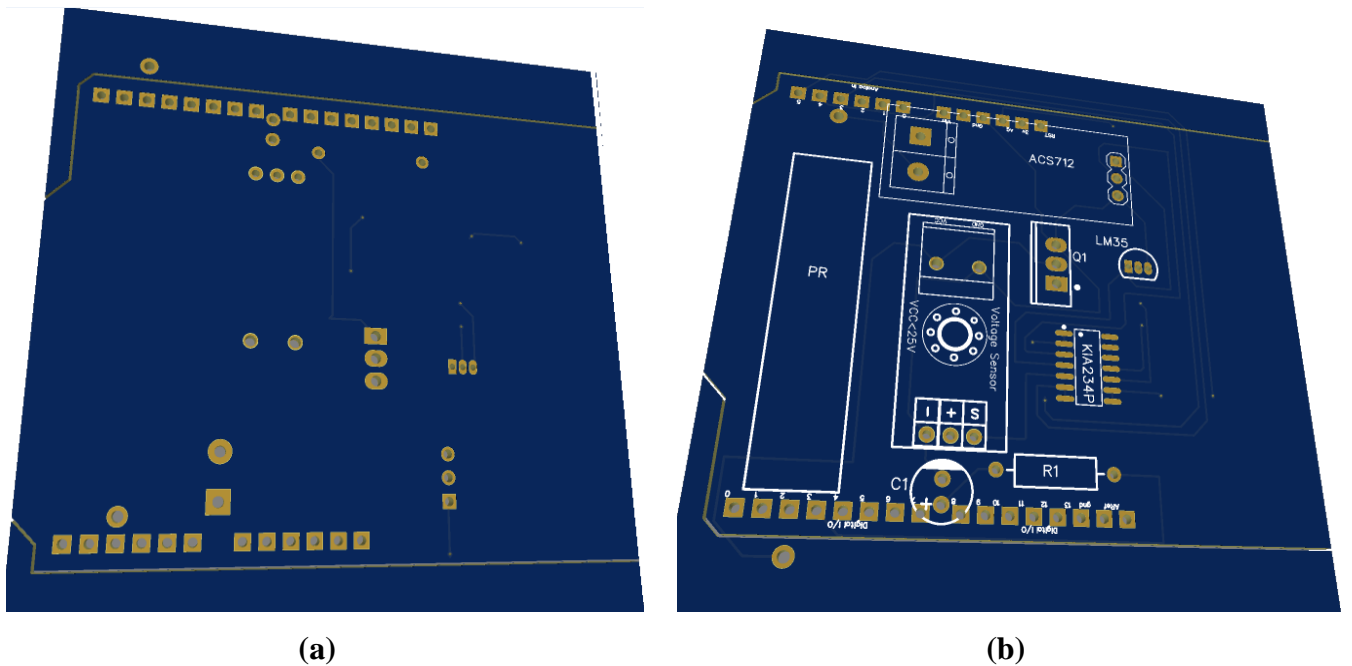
3D view of: (a) Bottom layer. (b) Top layer.
